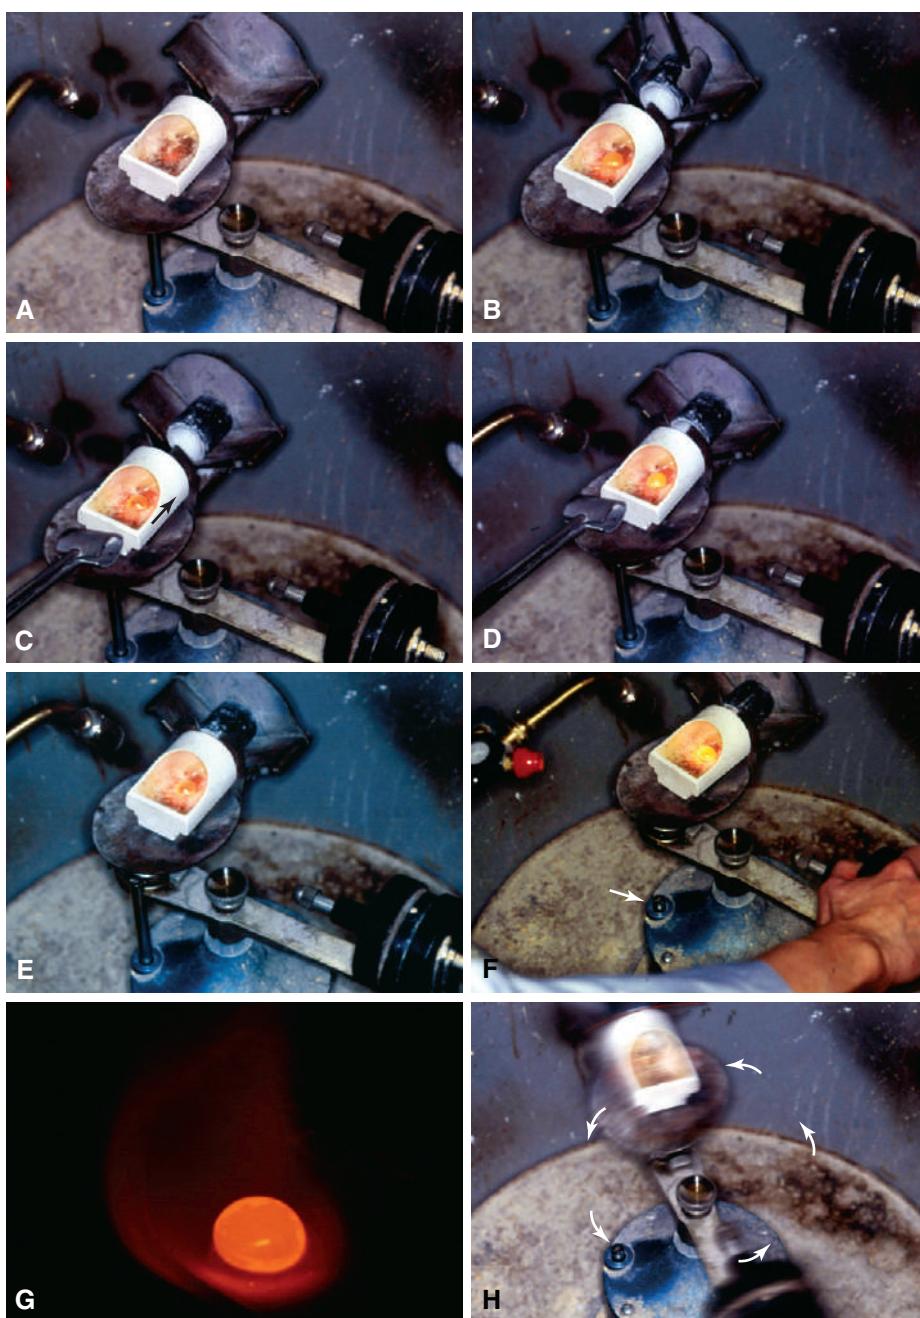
Casting technique. (A) The crucible is preheated. (B) The alloy is melted. When the alloy is molten, the casting ring is removed from the furnace and placed in the cradle. (C) Tongs are used to slide the crucible platform into contact with the casting ring (arrow). (D) The orifice of the crucible aligns with the sprue. (E) Heating continues for a few seconds so that the melting is complete and casting can proceed. (F) The casting arm is pulled forward until the pin drops (arrow). (G) The melted alloy, seconds before casting. (H) Centrifugal force carries the melted alloy into the mold cavity (arrows show the direction of spin).
